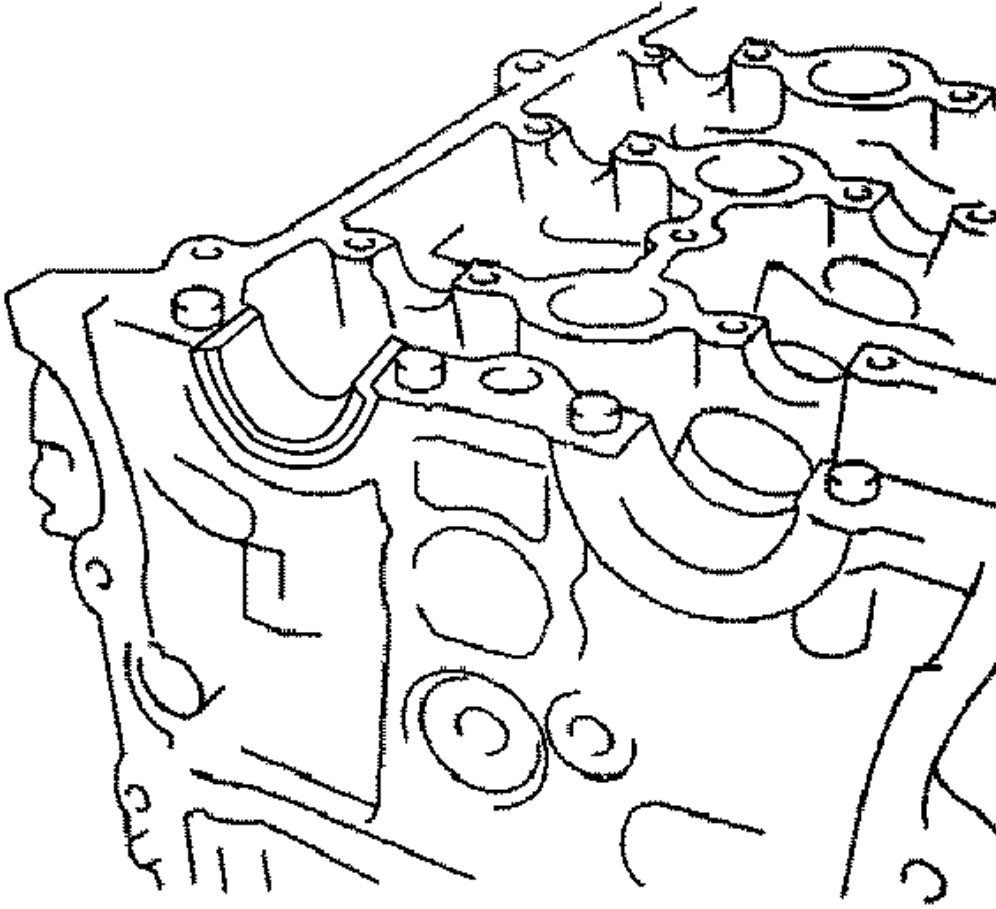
View Of Exhaust Camshaft Bearing Journals
